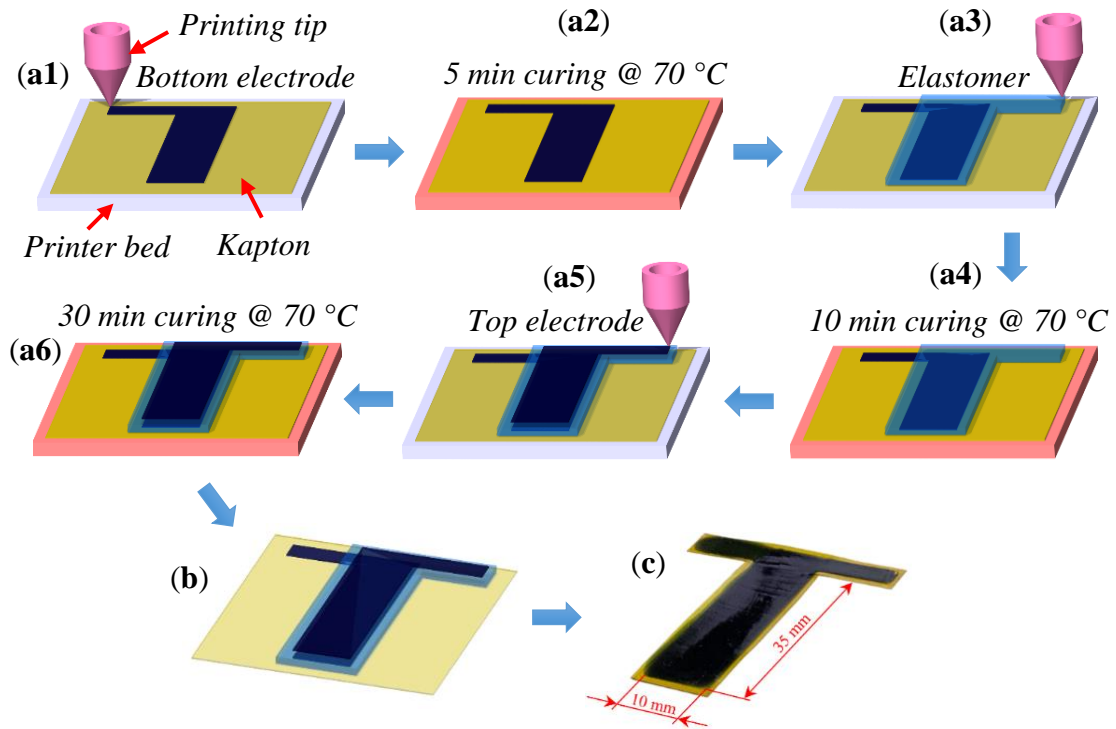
DEA unimorph actuator (a1) - (a6) printing layer sequence, (b) after printing, (c) final appearance.
